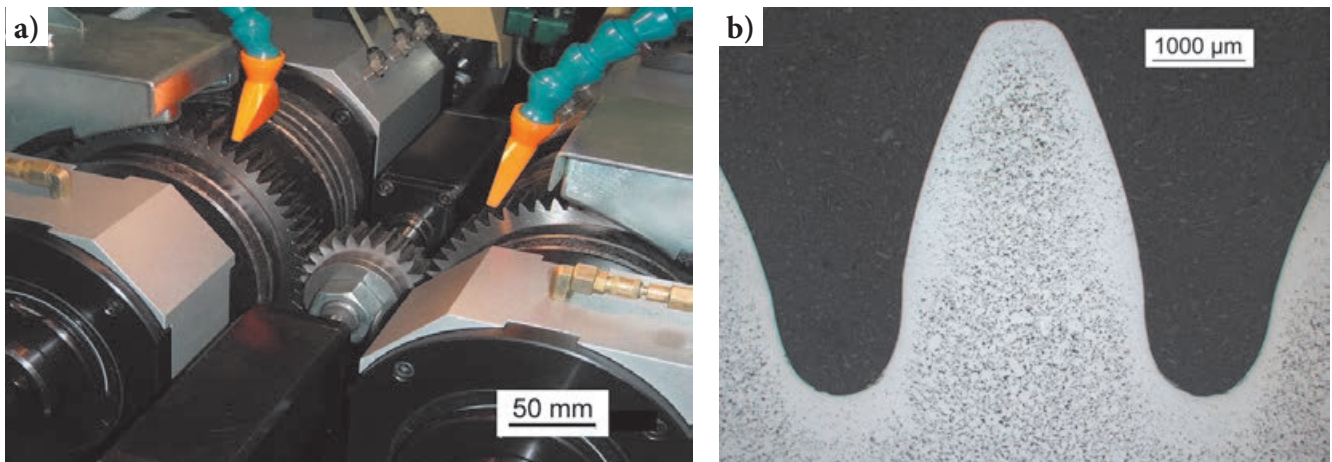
Surface densification of sintered gears to increase the load-bearing capacity, a) surface rolling process, b) section of a rolled gear
